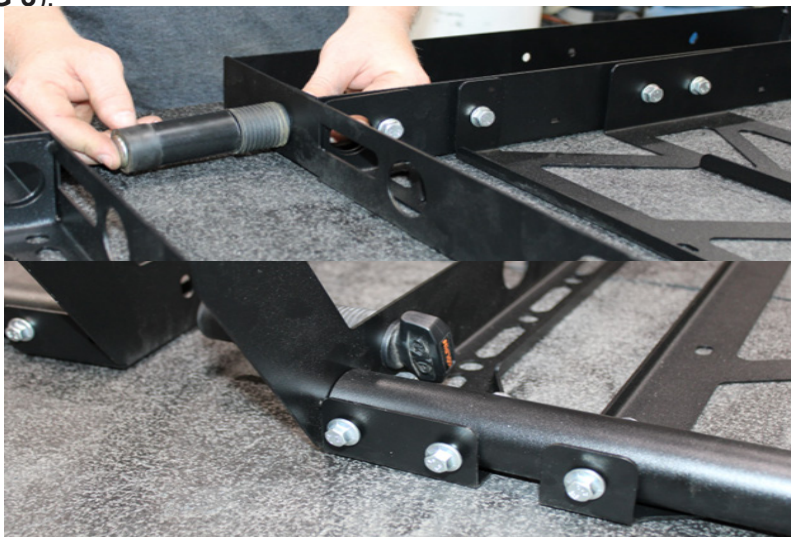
Install Kolpin Lock & Ride Mounting Kit to all 4 Bottom Corners of Assembled Side Panels
